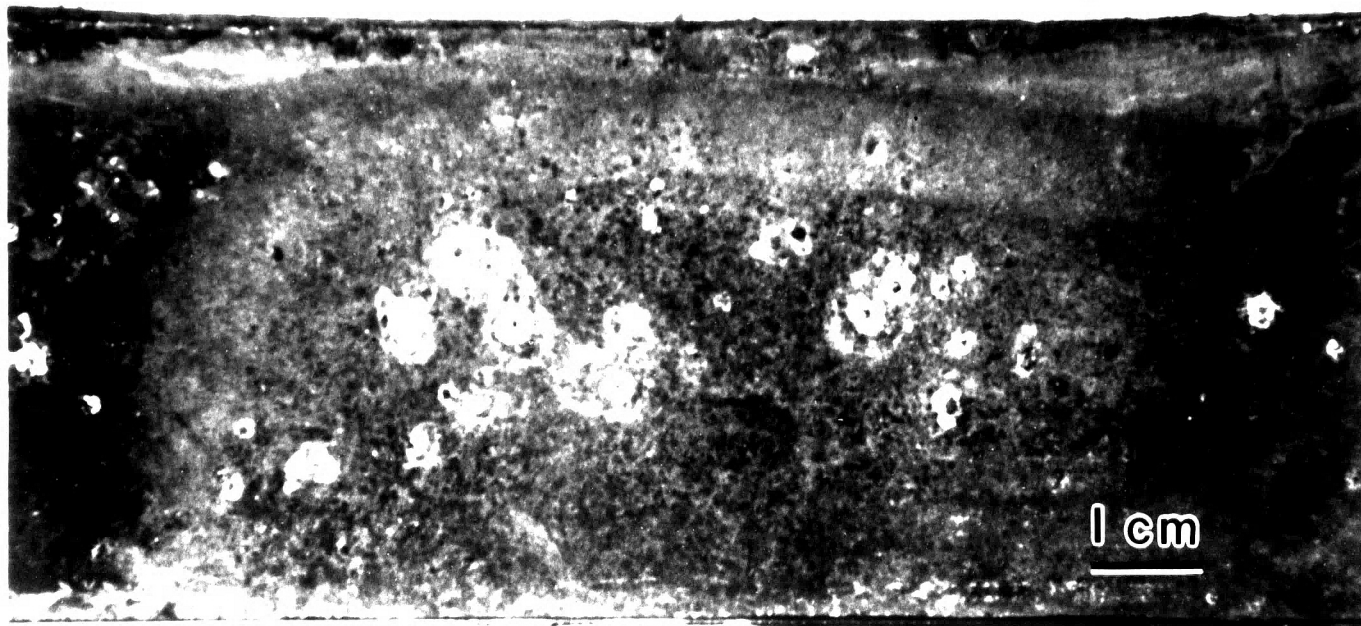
Surface Condition of ASTM A572 Steel Plate With Mill Scale and a 2400hr. Salt Water Exposure. (Specimen FE3).
